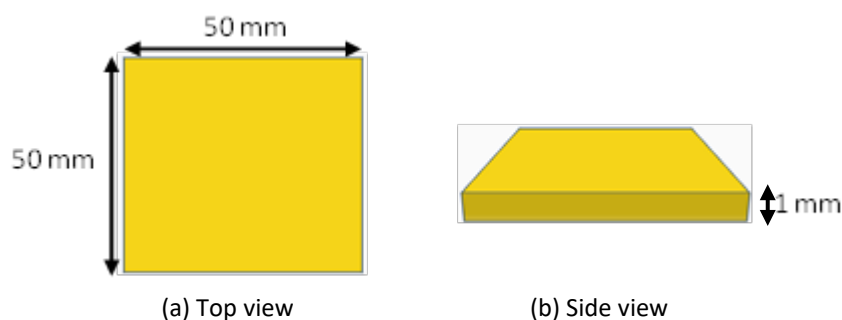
Dimensions of AC/epoxy samples from the (a) top view and (b) the side view
